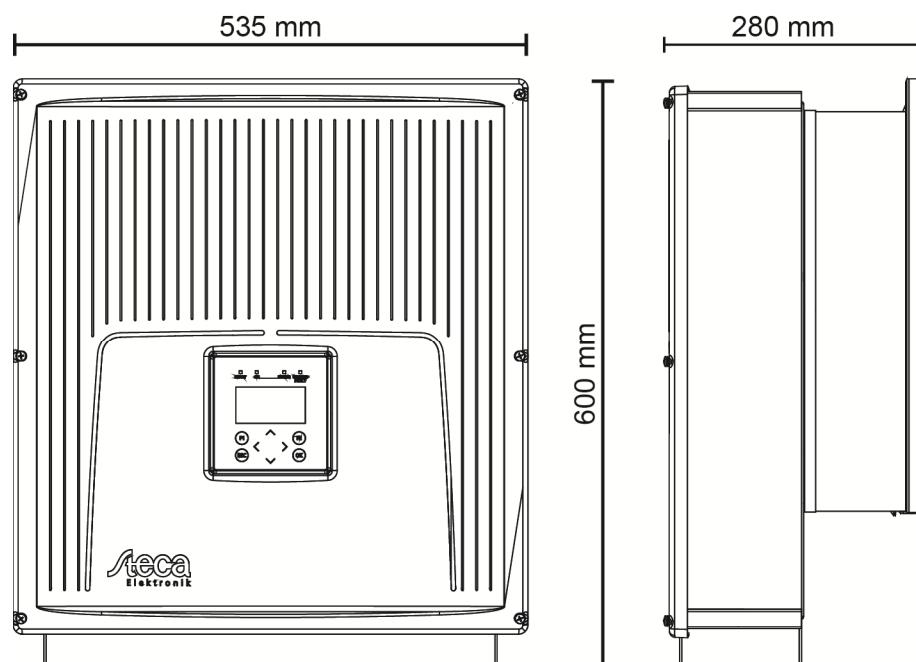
Outside Dimensions of the StecaGrid 20000 3ph and 23000 3ph
